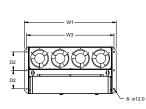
Floor installation diagram of inverters of 660 V, 250 to 355 kW
